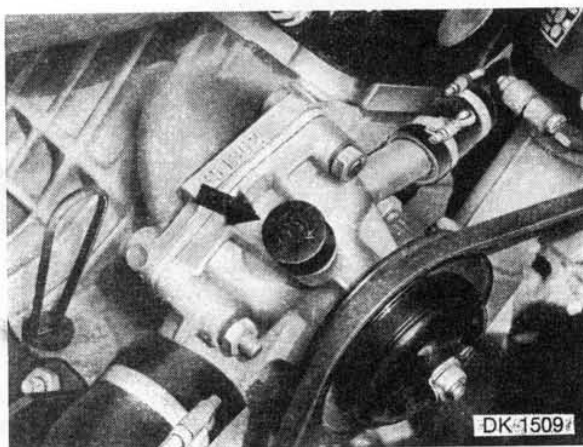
/4 - Lubricator of Water Pump Bearings
